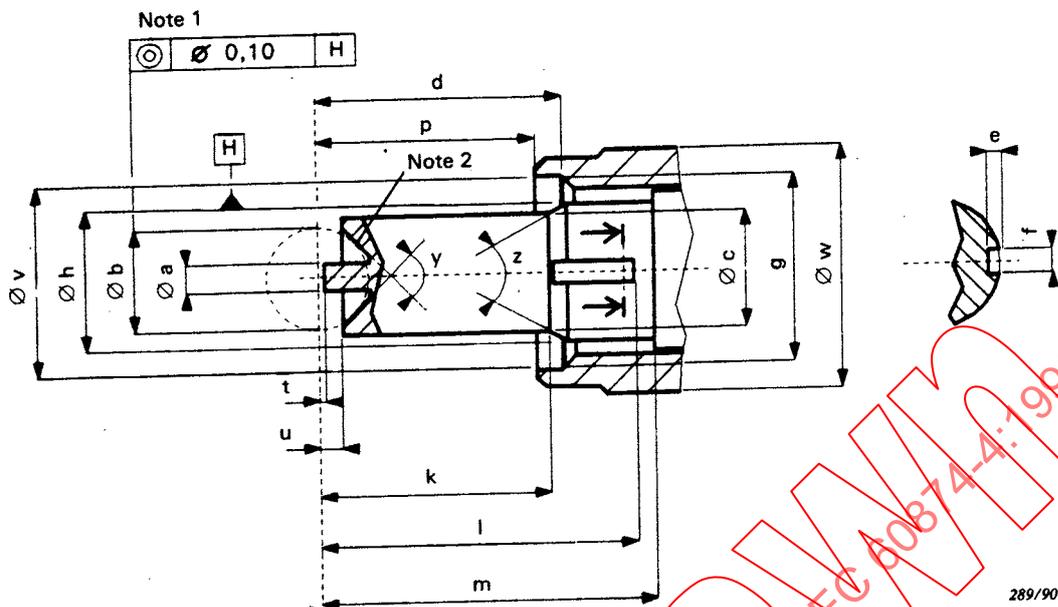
Interface drawing (for dimensions and notes see table A1)
